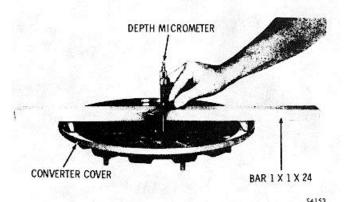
Measuring dimension "A" for selection of converter spacer (AT 543)
